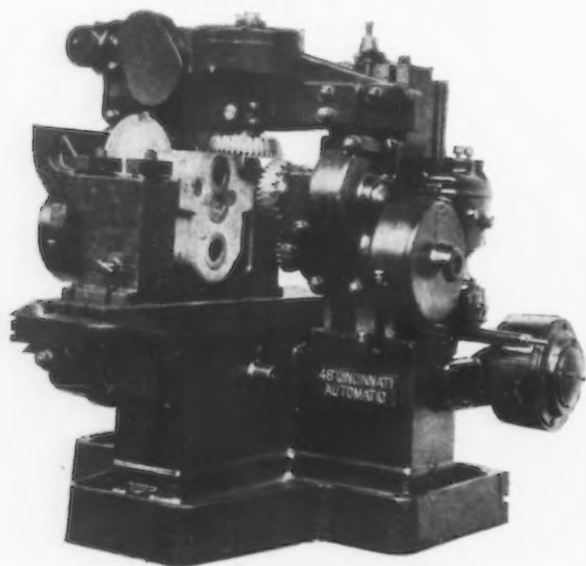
This Machine Is Standard Only in Its Base. The spindle carriers and head-stock are special. The overhead mechanism and the fixture to hold the piece were worked out in cooperation with the user
